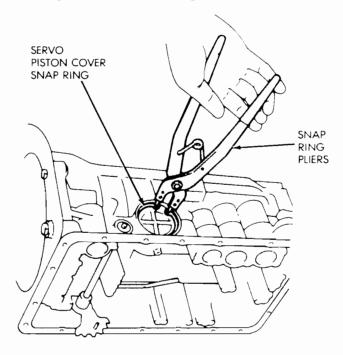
Removing/Installing Servo Piston Cover Snap Ring
